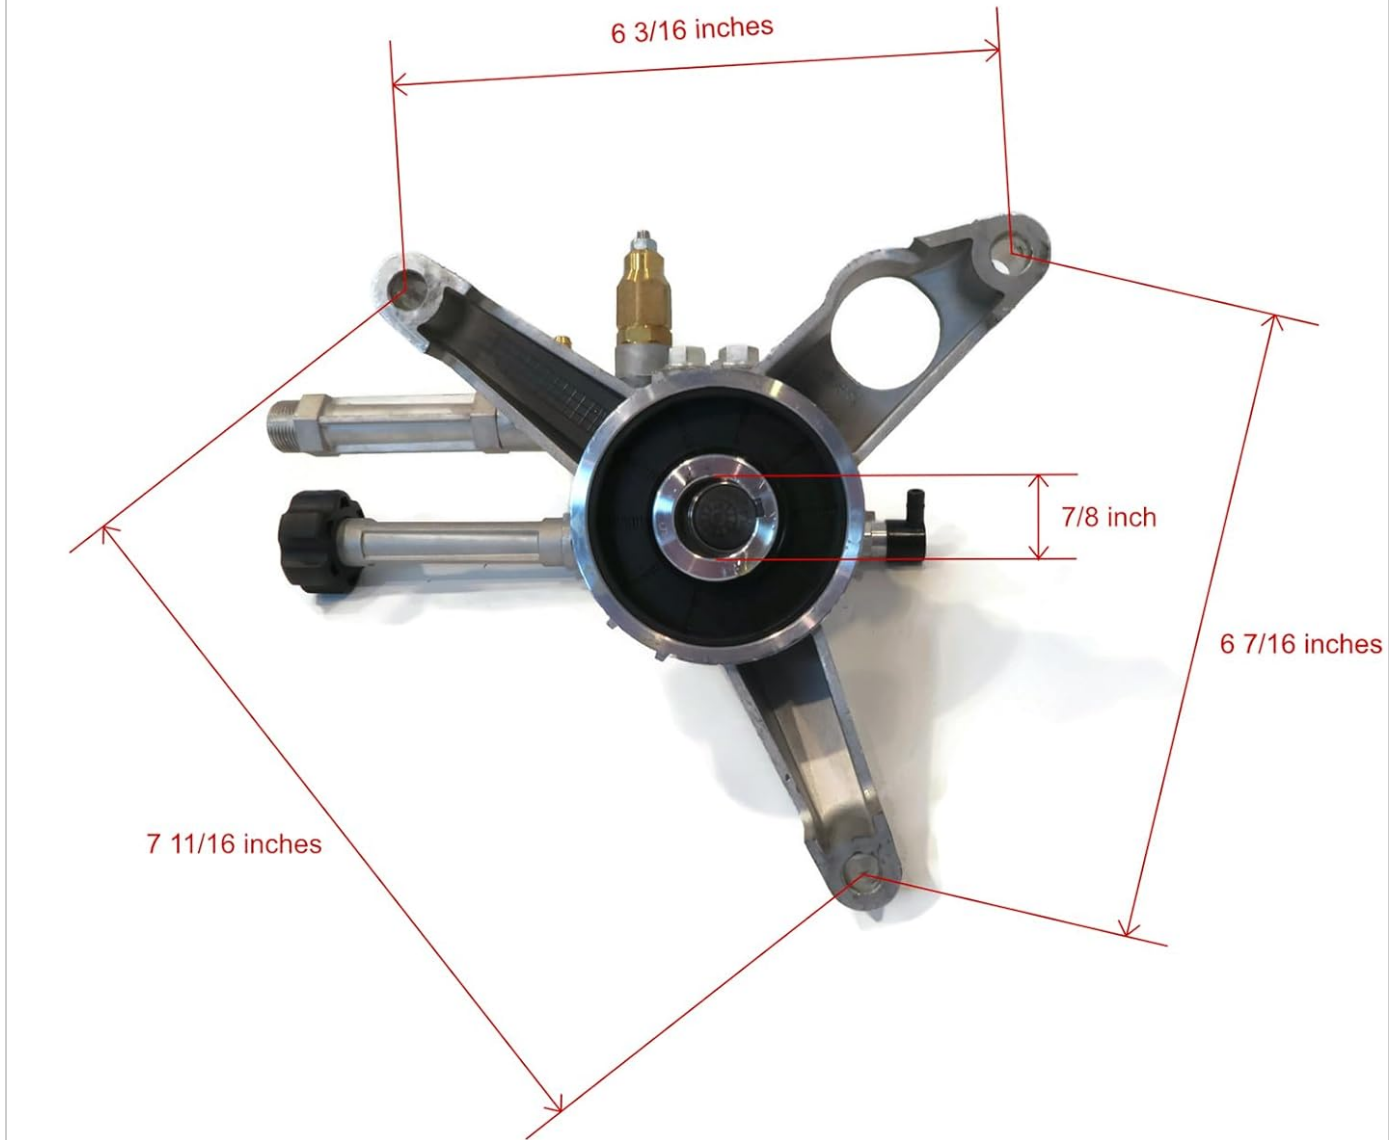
Top-down view of the pump, illustrating key dimensions and shaft size.
